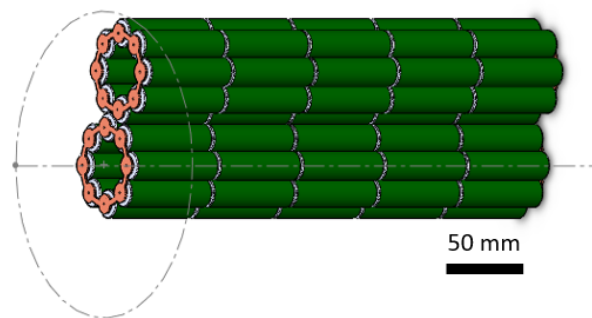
Battery Assembly. Batteries are assembled into cylinders, connected via copper cutouts and designed to fit into the weight-shifting apparatus onboard. The sketched circle has a diameter of 6 inches, allowing for room between the batteries and the hull. Also, the circle shows the path of the batteries as they are rotated via the weight shifting mechanism. This off-center center of mass is essential for the operation of the vehicle as it allows for shifting the vehicle’s COM port or starboard with one rotational input.
